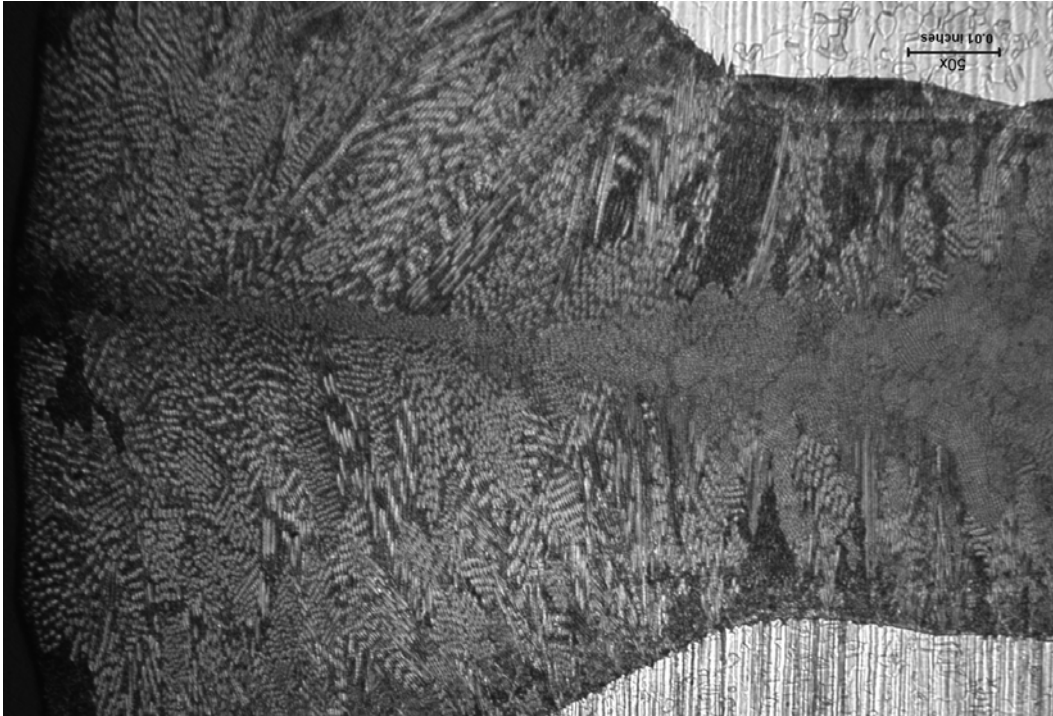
Section of can 2 laser weld at 50X magnification.
